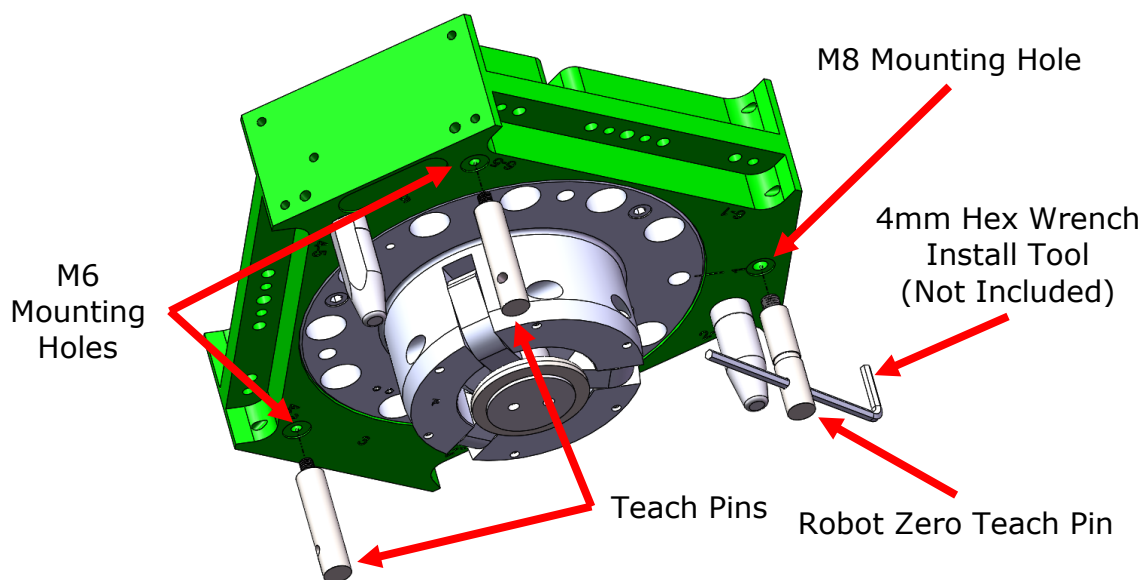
Teach Pin Mounting – E160 Robot Side
